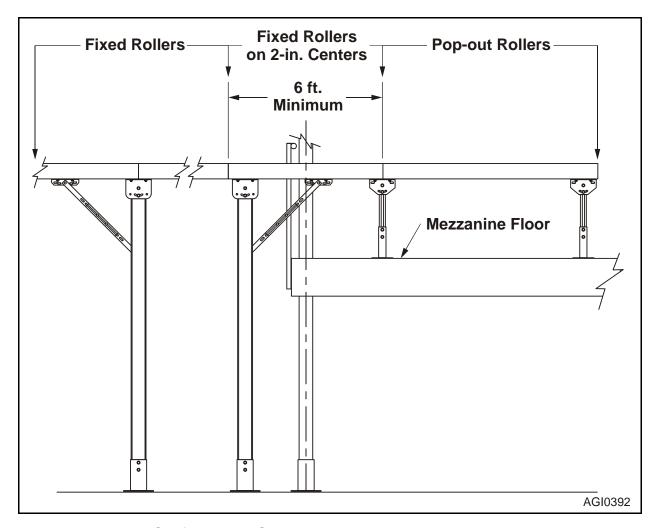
1 Roller Configuration: Conveyors that Extend Past Mezzanine Edges
